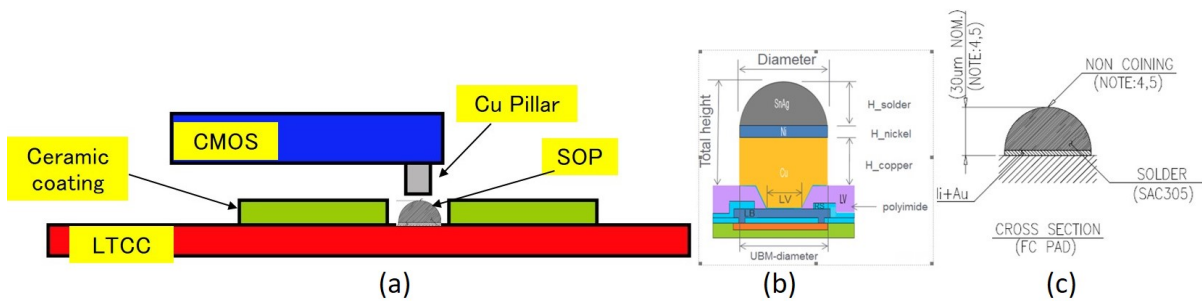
a) Sketch for the CMOS chip flipped on the interposer. b) Drawing for the copper pillar. c) Drawing for the SOP.
